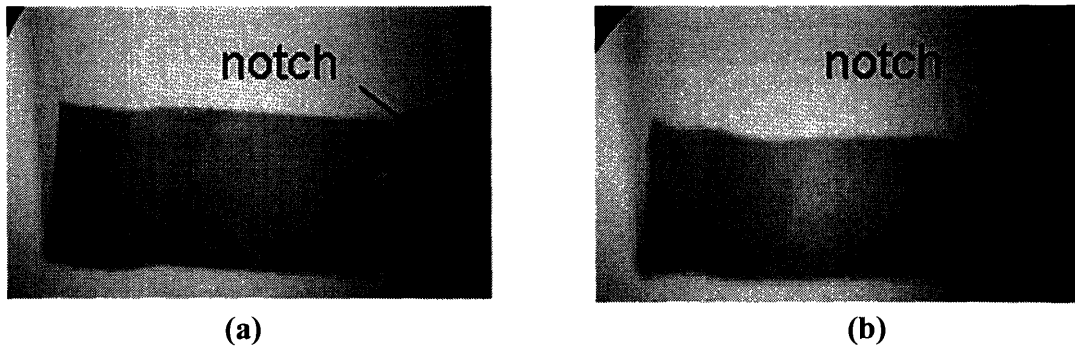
Fracture surface of 6.35mm thick sample for (a) Quasi-Static Izod (b) Notched Izod impact
